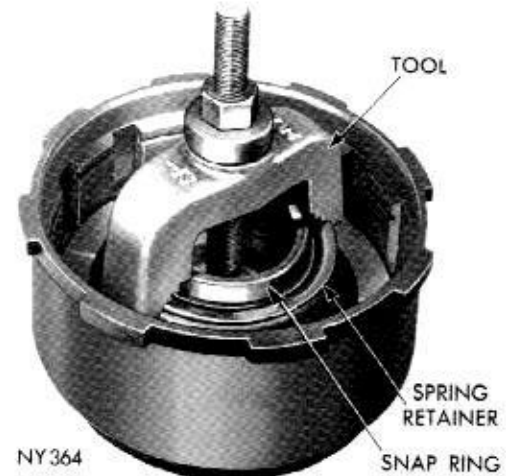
Removing or Installing Front Clutch Retainer Snap Ring (A-904)
